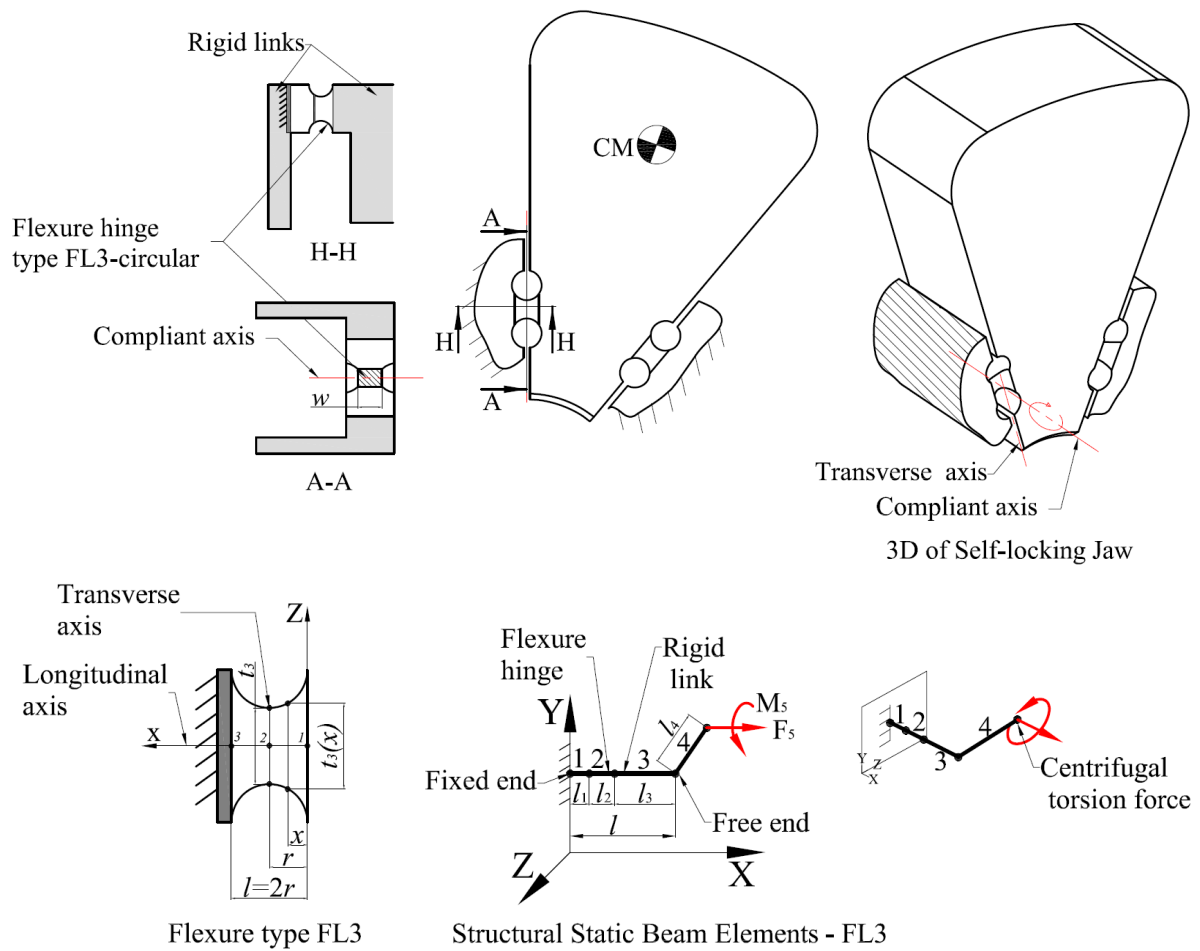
Flexure design, schematic view of flexure type FL3
